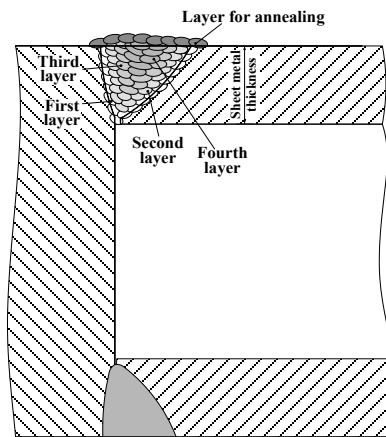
Appearance of the order of deposition of weld beads along the cross-section
